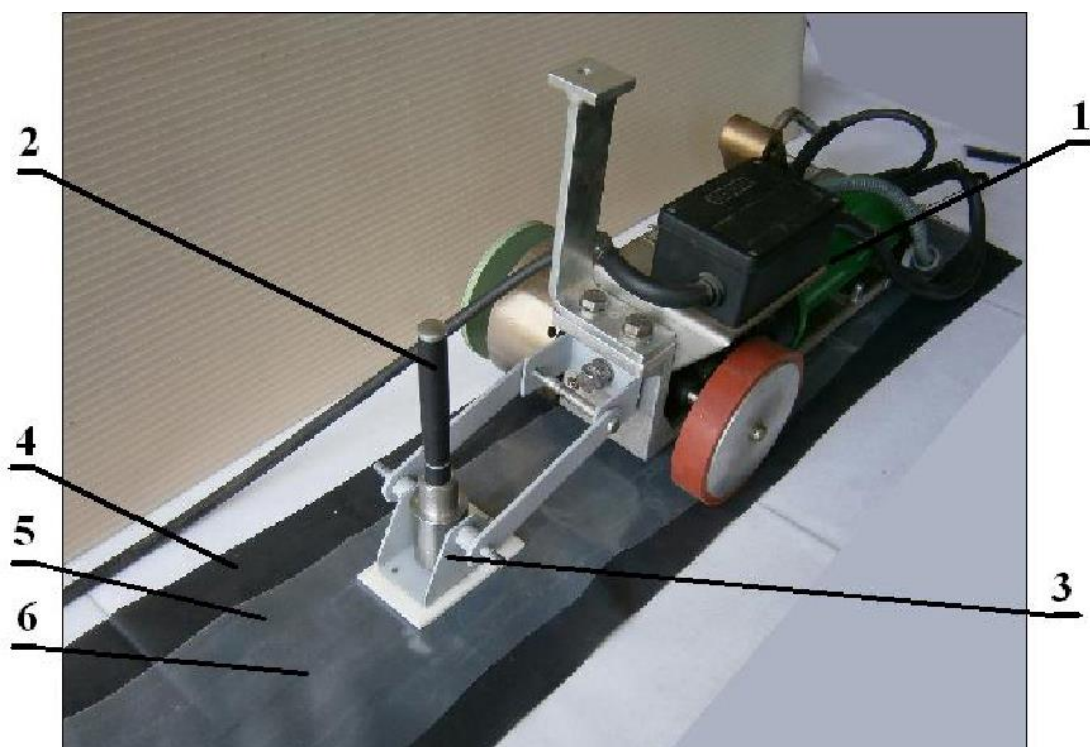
Experimental installation for transmission laser welding of polymer film with short-focus laser.
